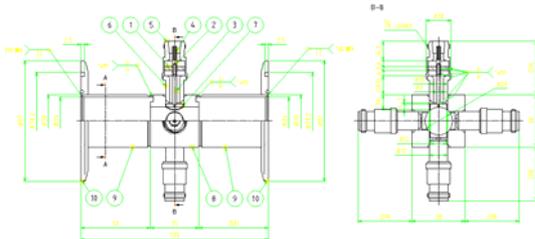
Drawing of the BPPM PU that is 4-Button type.
